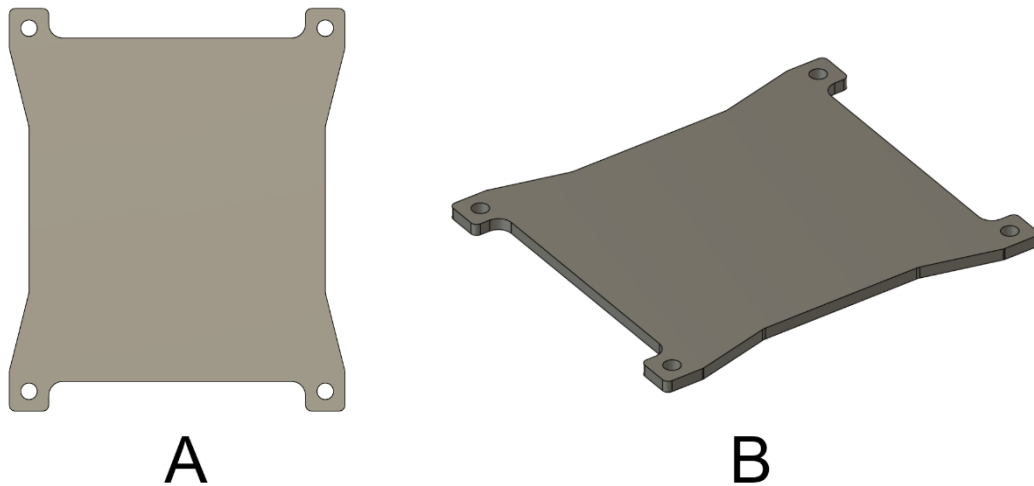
First XY plate concept, 6mm thick 6061-T6 aluminium, with four mounting points to connect them together.
